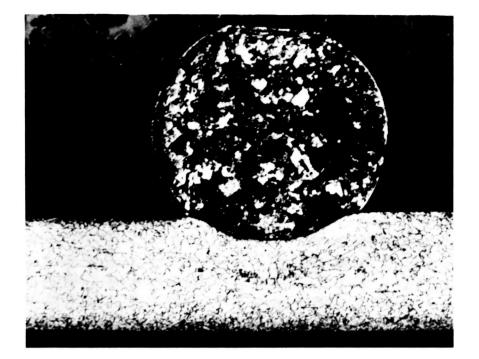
Weld joint 1.6. JPL 1; solder coated copper wire to Inco ribbon; not sterilized; 150x magnification; nitric-acetic etch (02337).
